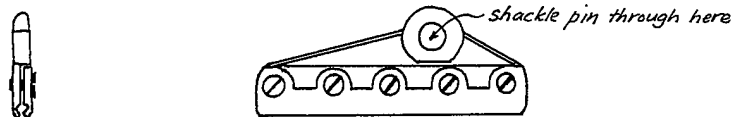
Types of ears used in construction of overhead for St. Kilda Tramway (Scale 1:5).
